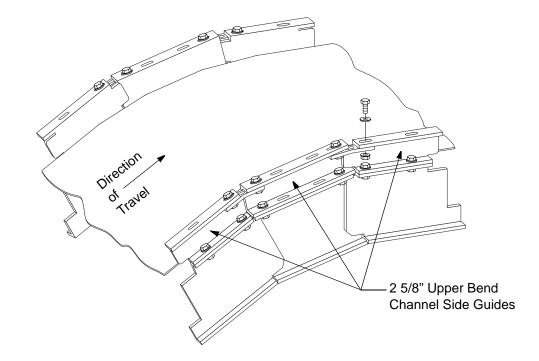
Upper Bend Unit with Channel Side Guides, Direct Mounting
